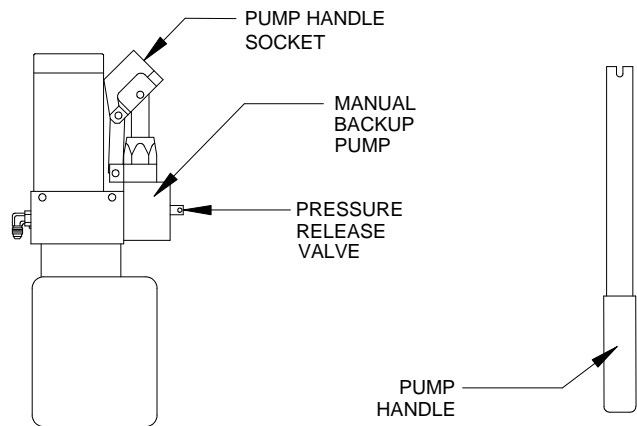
MANUAL BACK-UP PUMP & HANDLE
